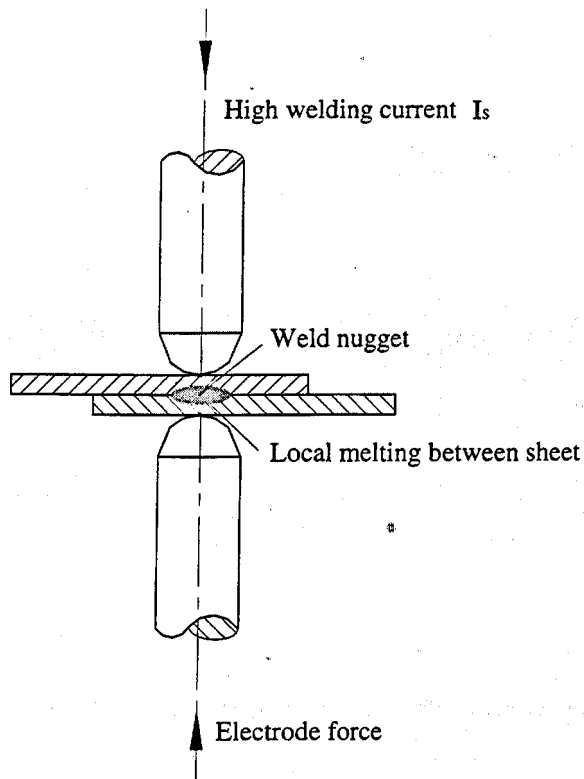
Schematic of the principles of resistance spot-welding process
